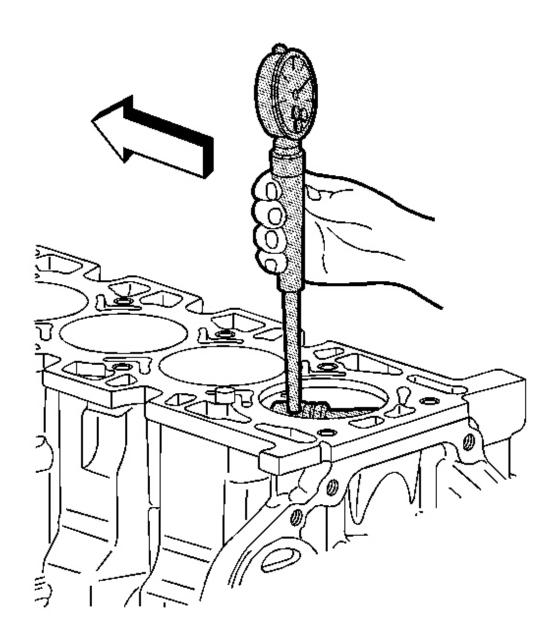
Measuring Cylinder Bores With J 8087 Courtesy of GENERAL MOTORS CORP.
